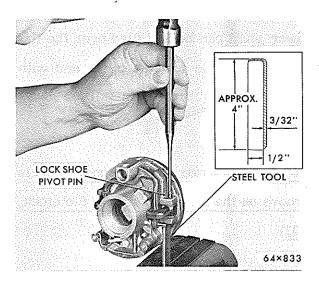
Removing the Lock Shoe Pivot and Tool Insert
